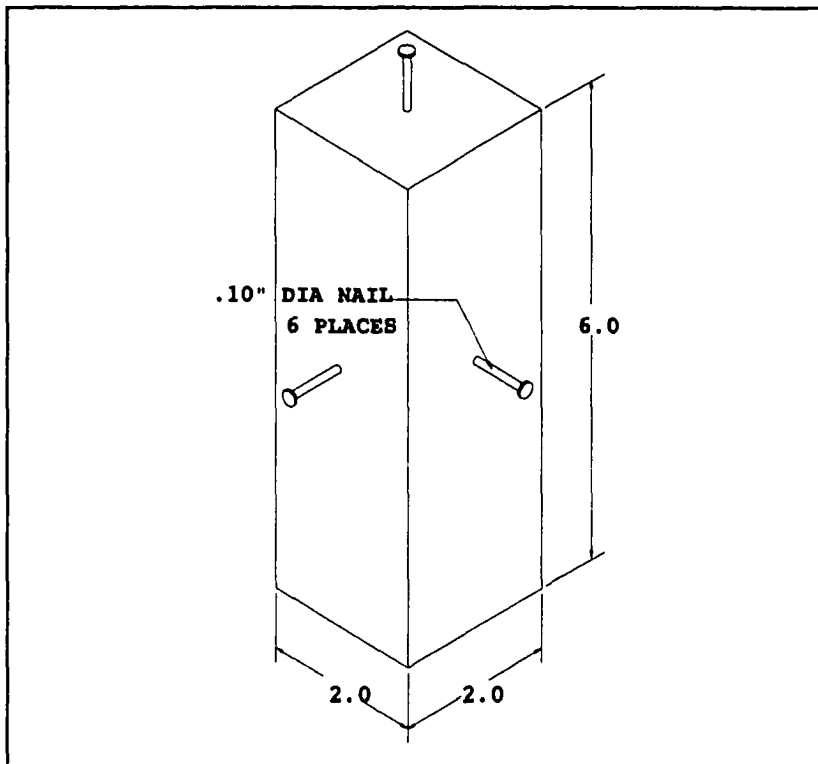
NAIL WITHDRAWAL SPECIMEN
